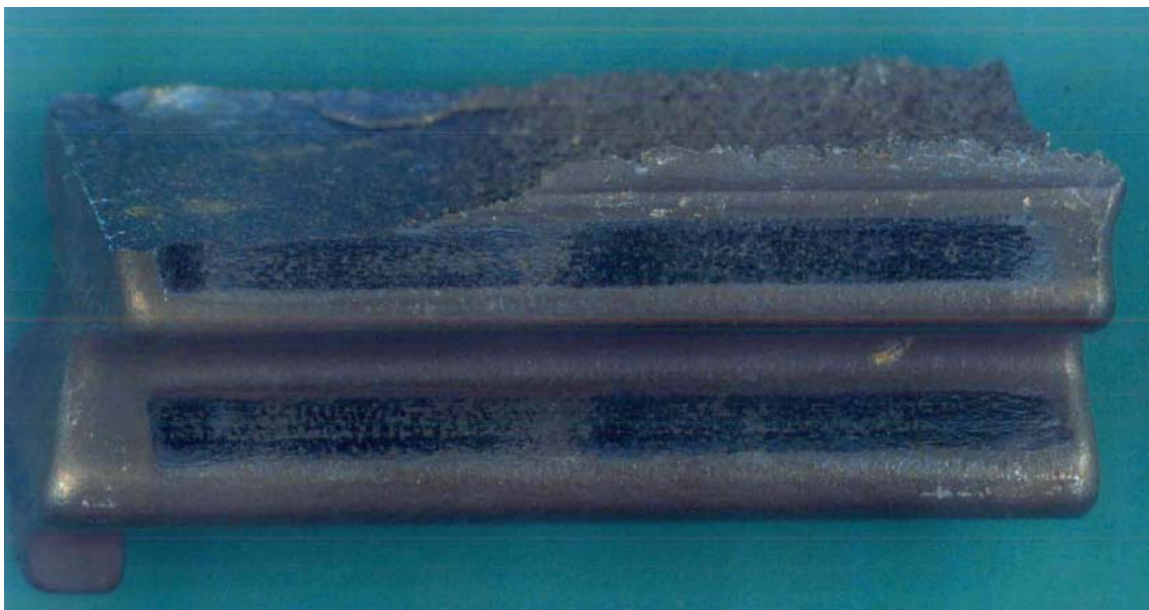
Side view of low pressure turbine blade upper tooth fracture surface.
